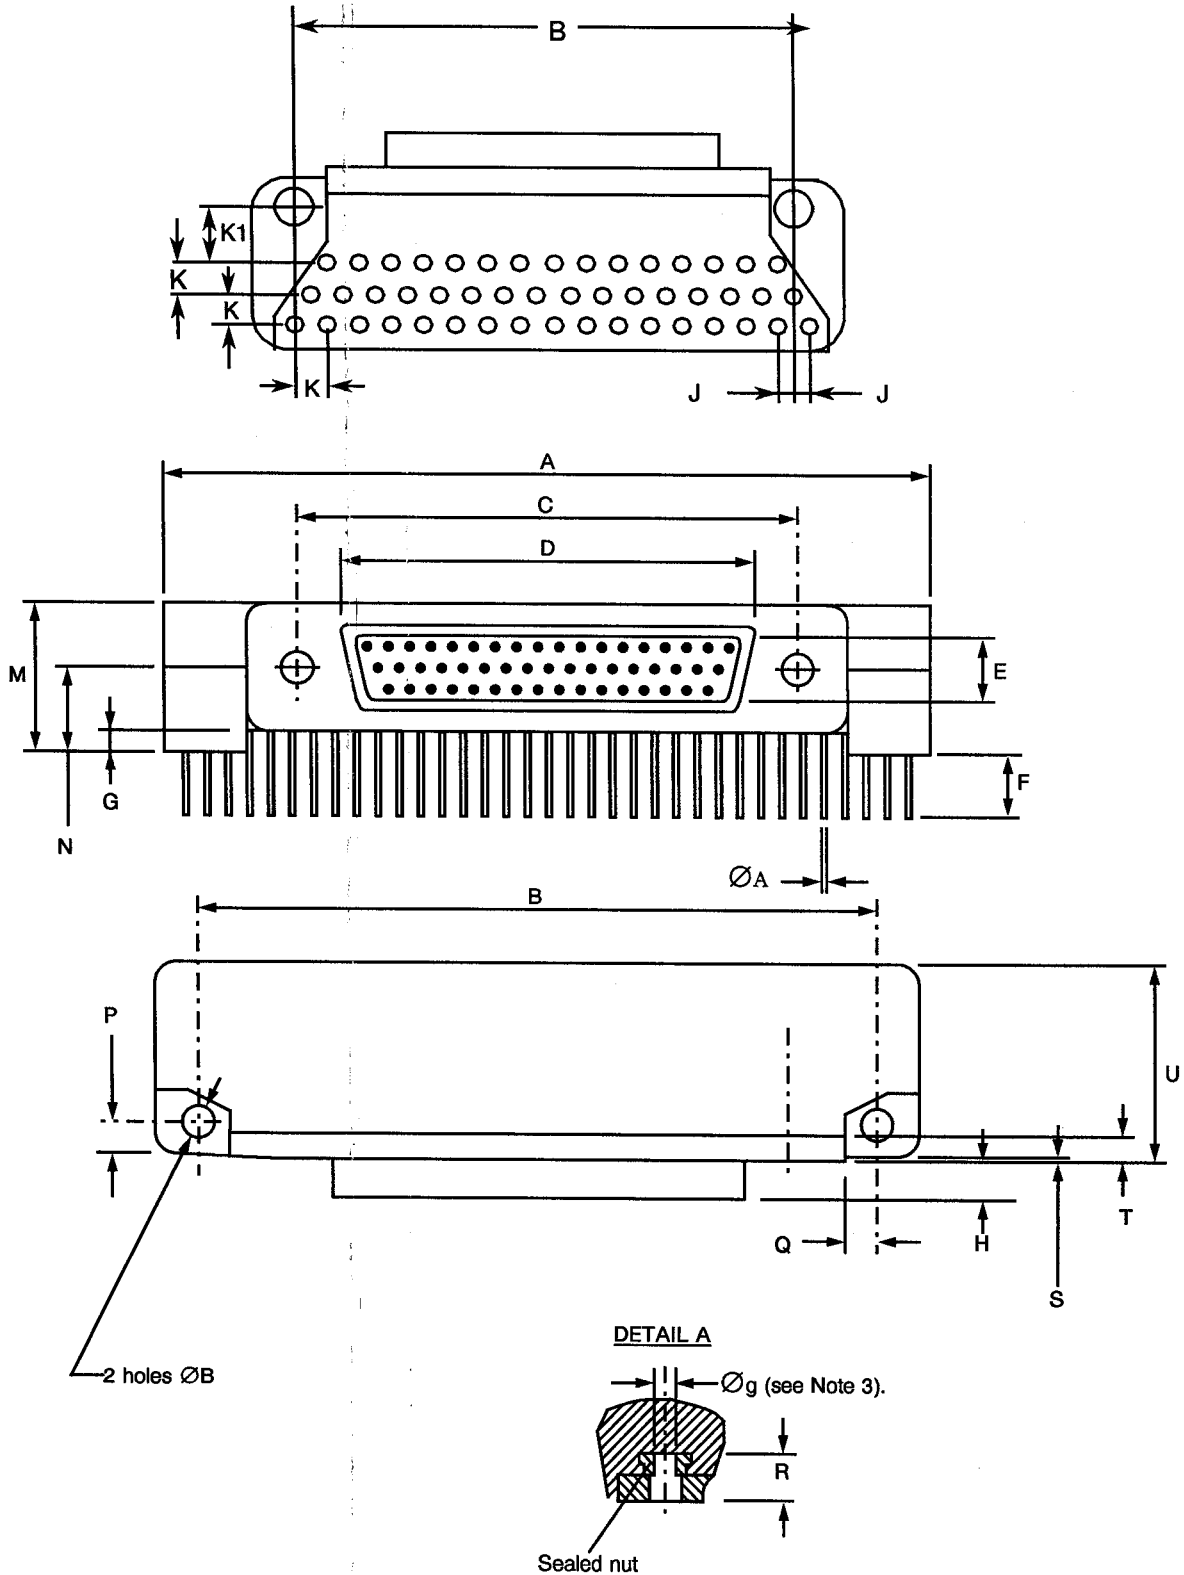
PHYSICAL DIMENSIONS (CONTINUED)
